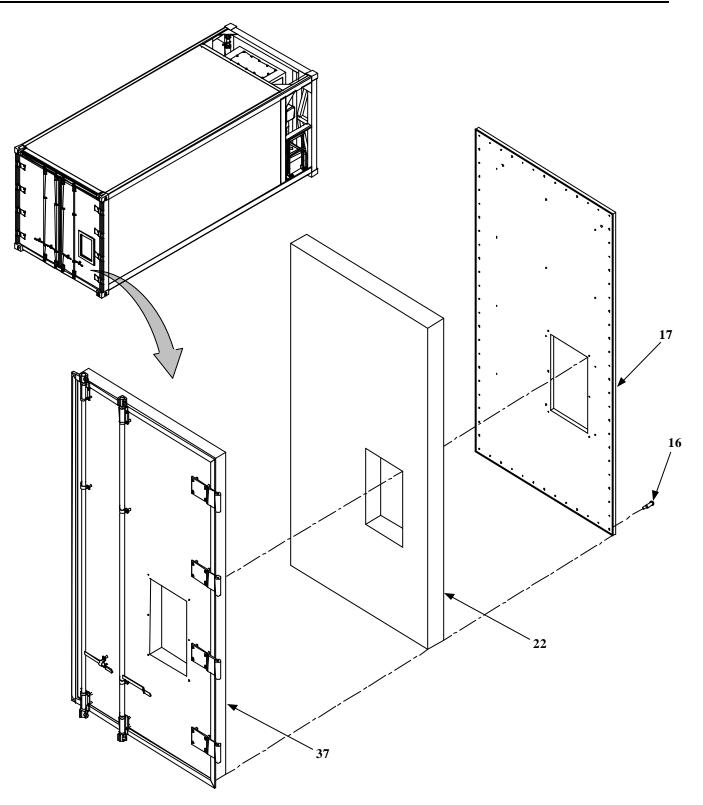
Right Hand Door Assembly (Sheet 2 of 4)
